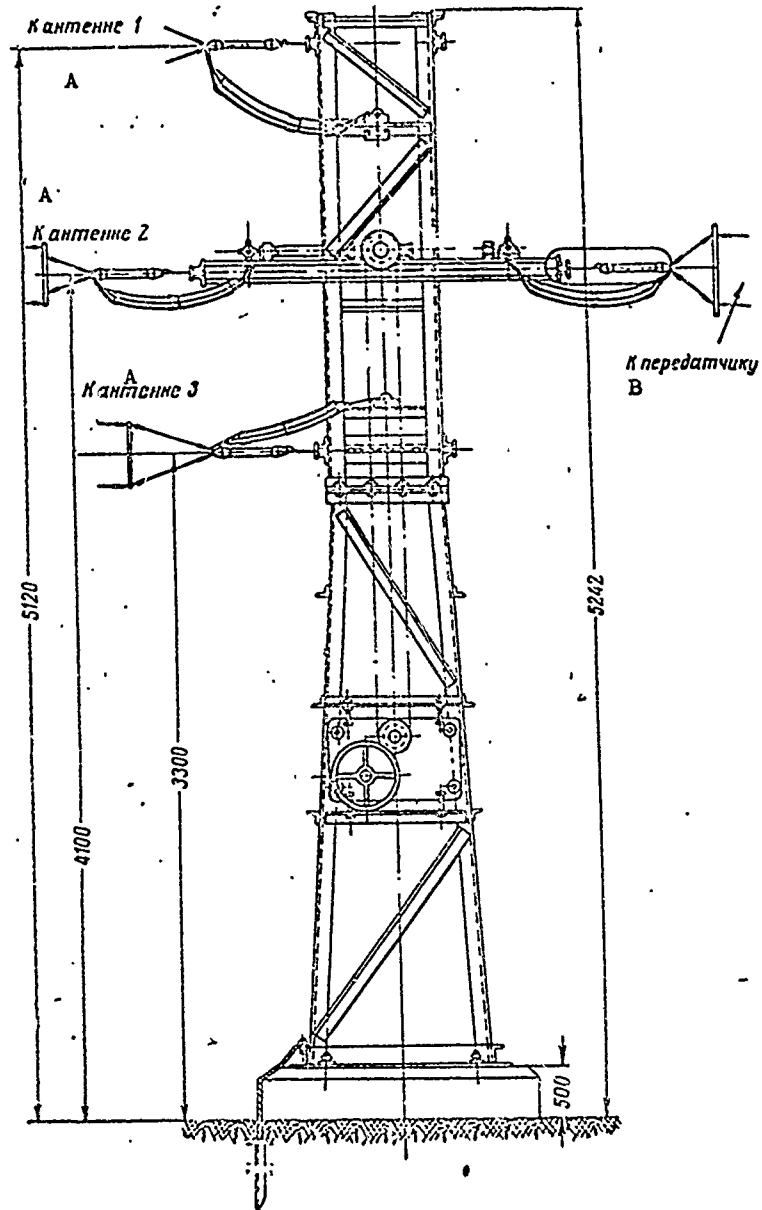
Switch for a 1x3 outside installation with remote control.
